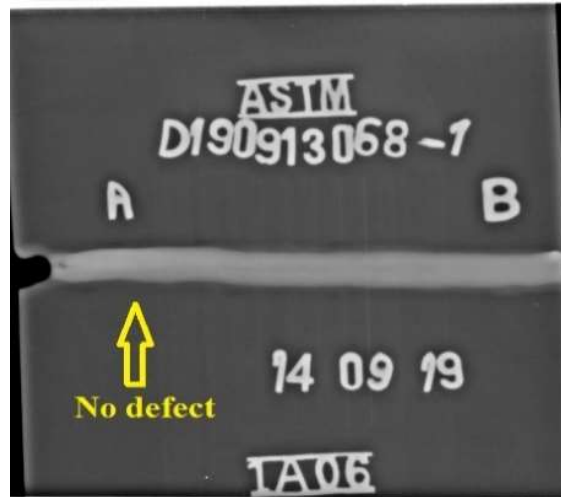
Radiography test as per ASME Sec.-V:2017 of CMT welded sample
